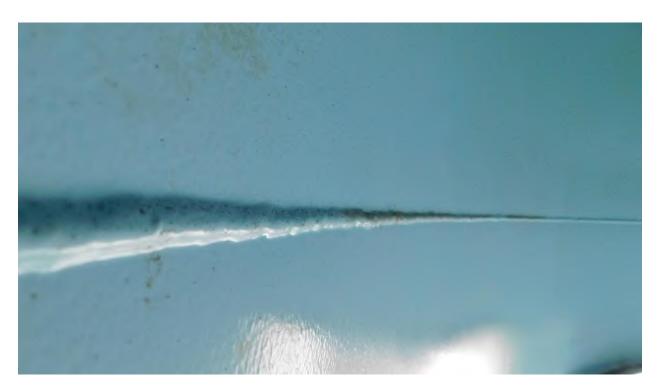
Shell Butt Vertical Weld Profile
